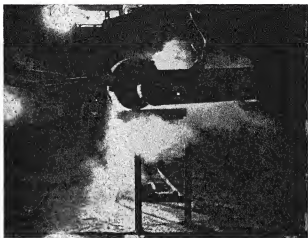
Swing Frame Grinder of "Standard" design. Grinding Wood.
